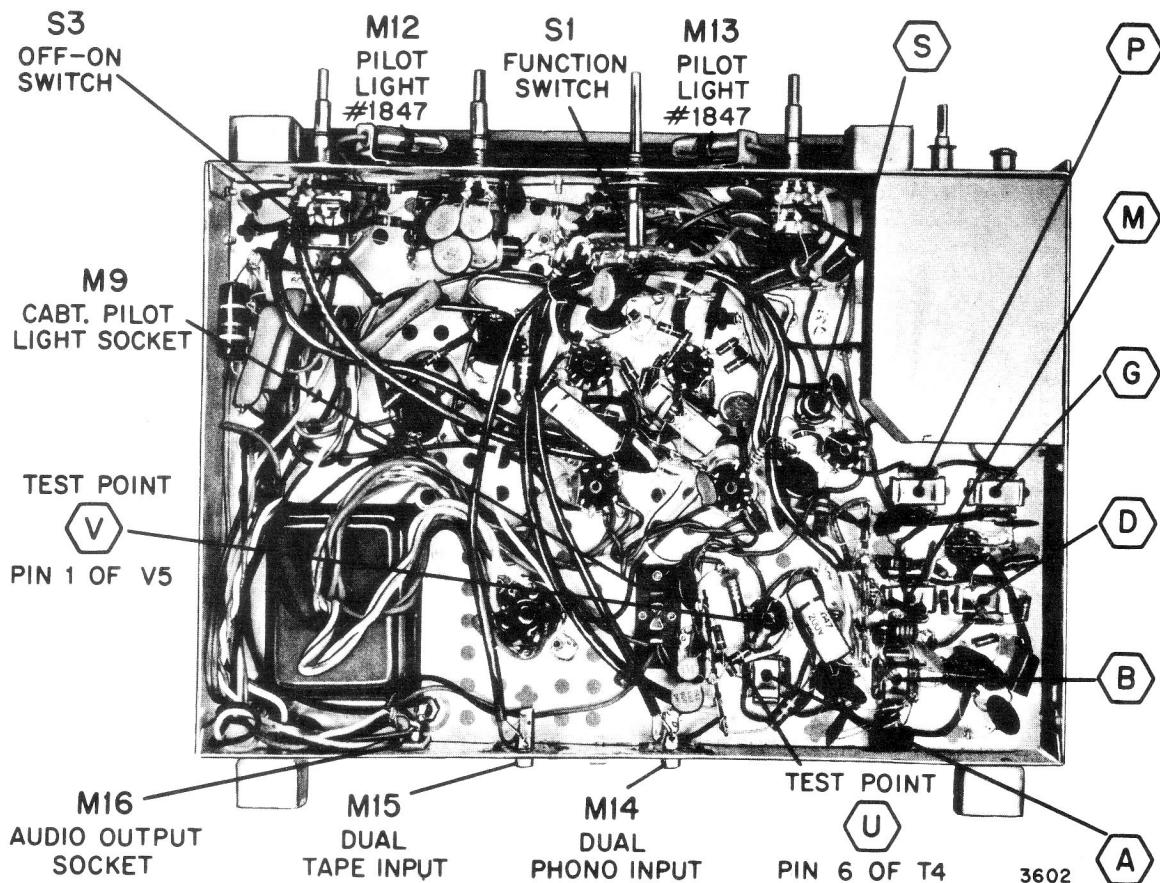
BOTTOM VIEW OF12D1AX CHASSIS . INPUT CONNECTIONS, OUTPUT CONNECTIONS and ALIGNMENT POINTS SHOWN
